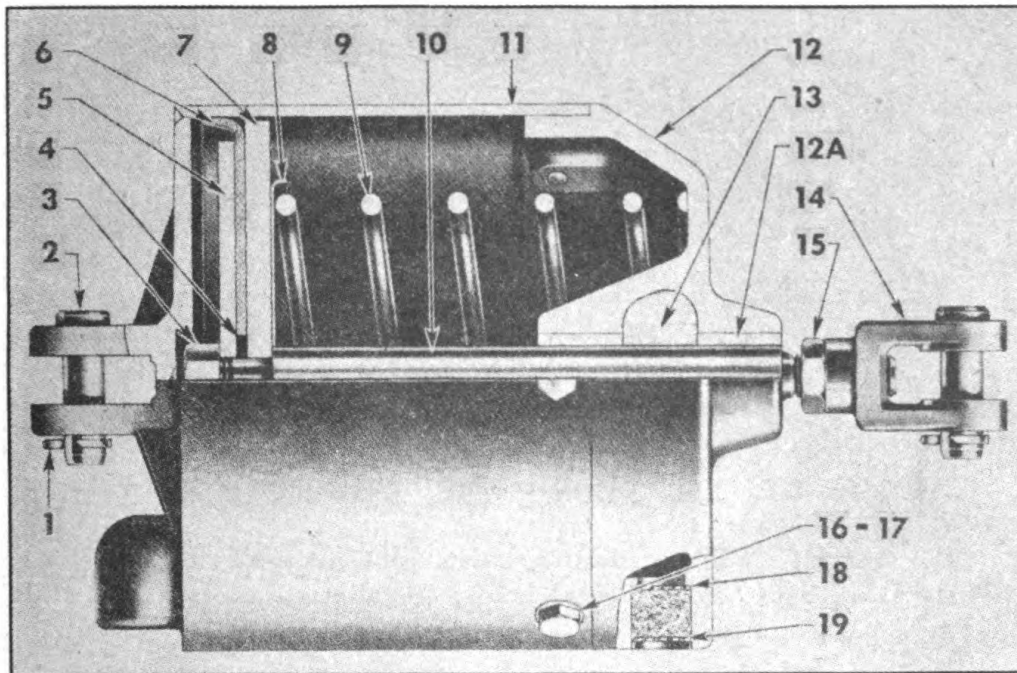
BRAKE CYLINDER—SECTIONAL VIEW
